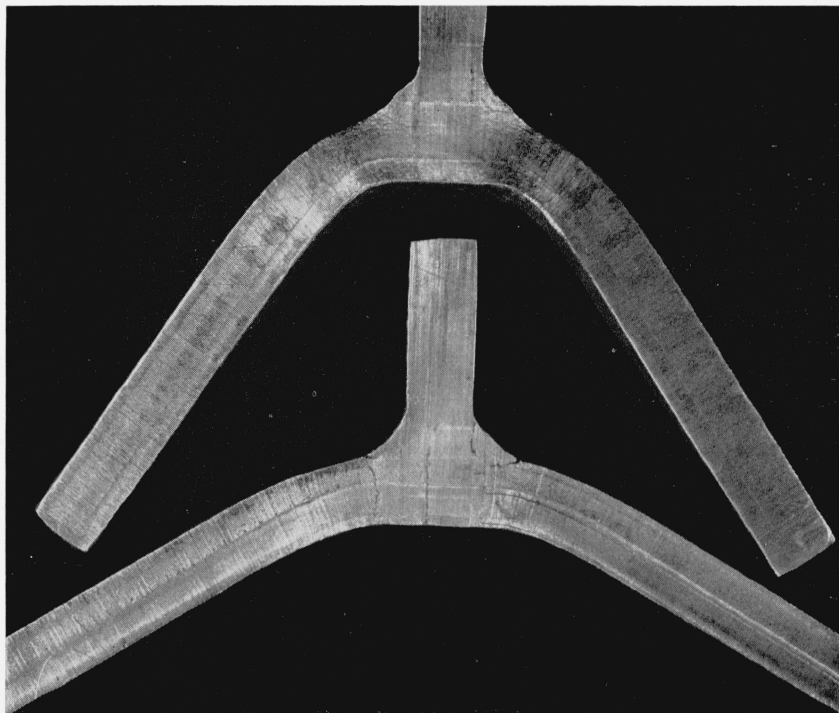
Cast and welded fillets tested in T-bend jig.
